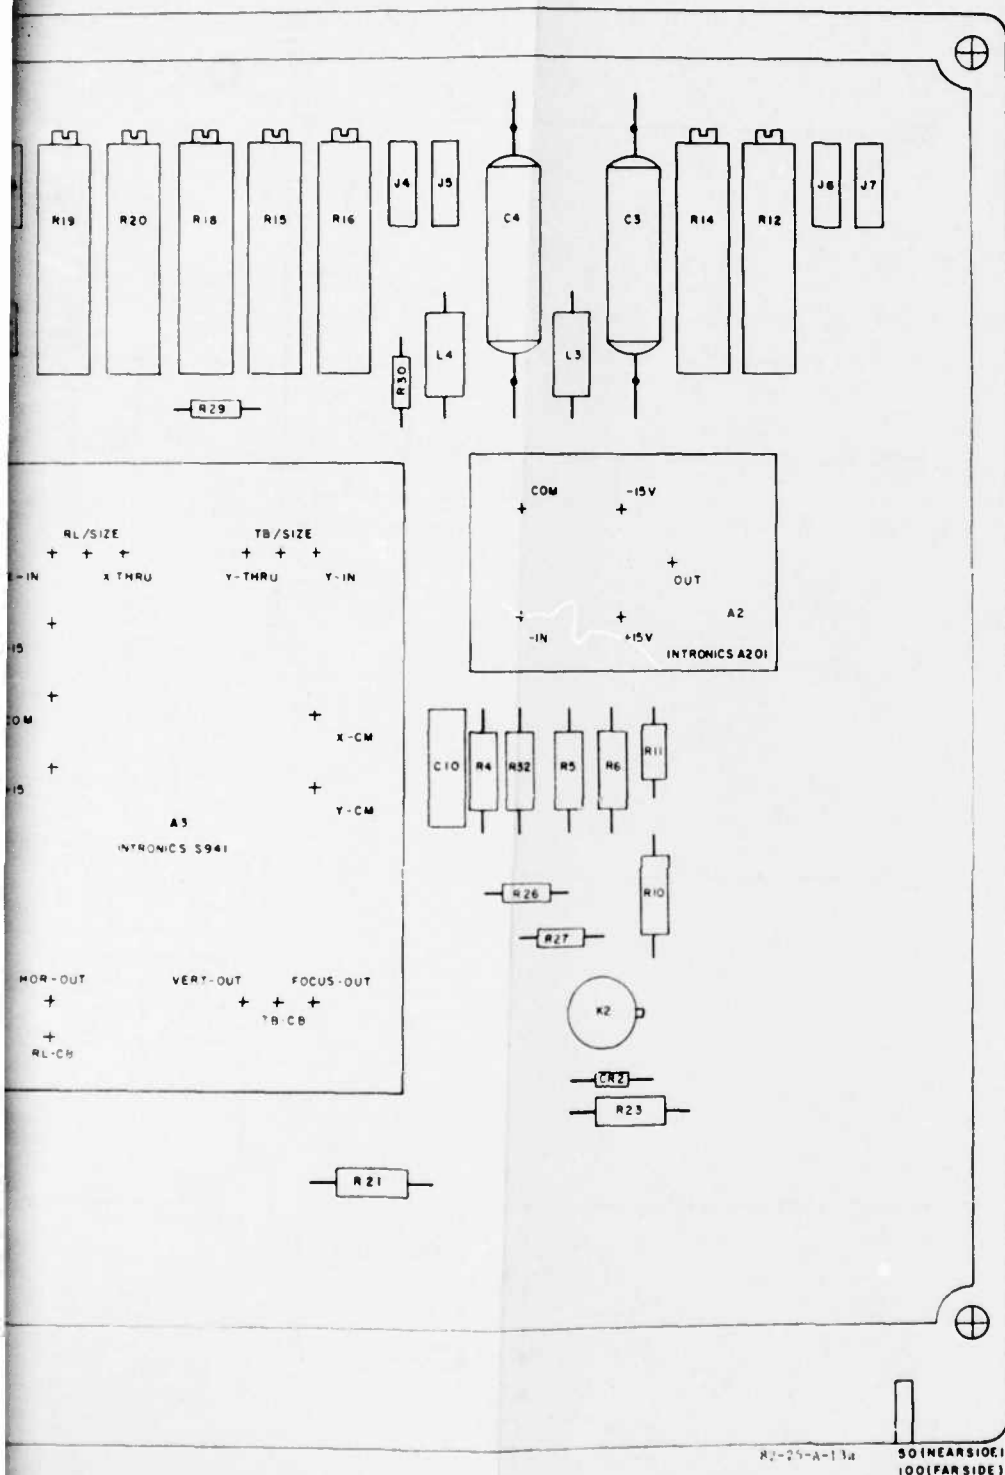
MODIFIED A5 PCB — DRIVER PVD (SHEET 1 OF 2)
